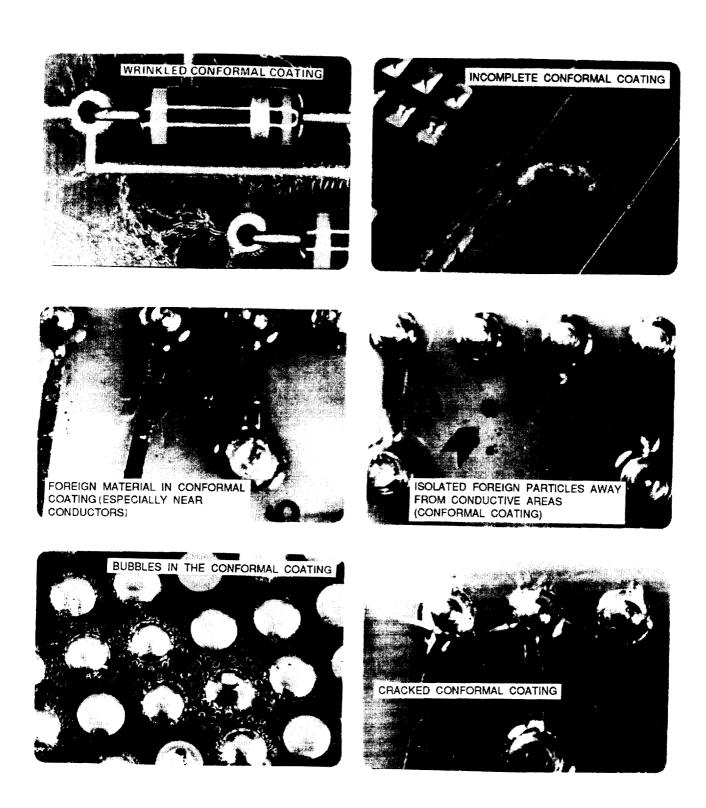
Examples of Assembling and Packaging Problems (Continued)
